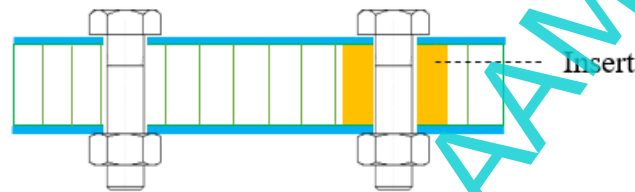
Left bolted joint without insert; right bolted joint with insert
